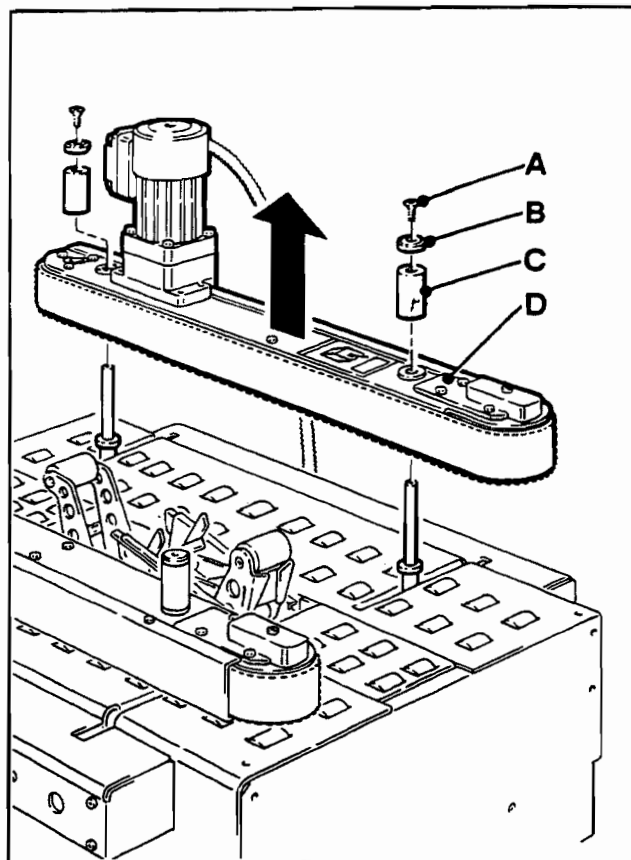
Drive Belt Assembly – Case Sealer Disassembly
